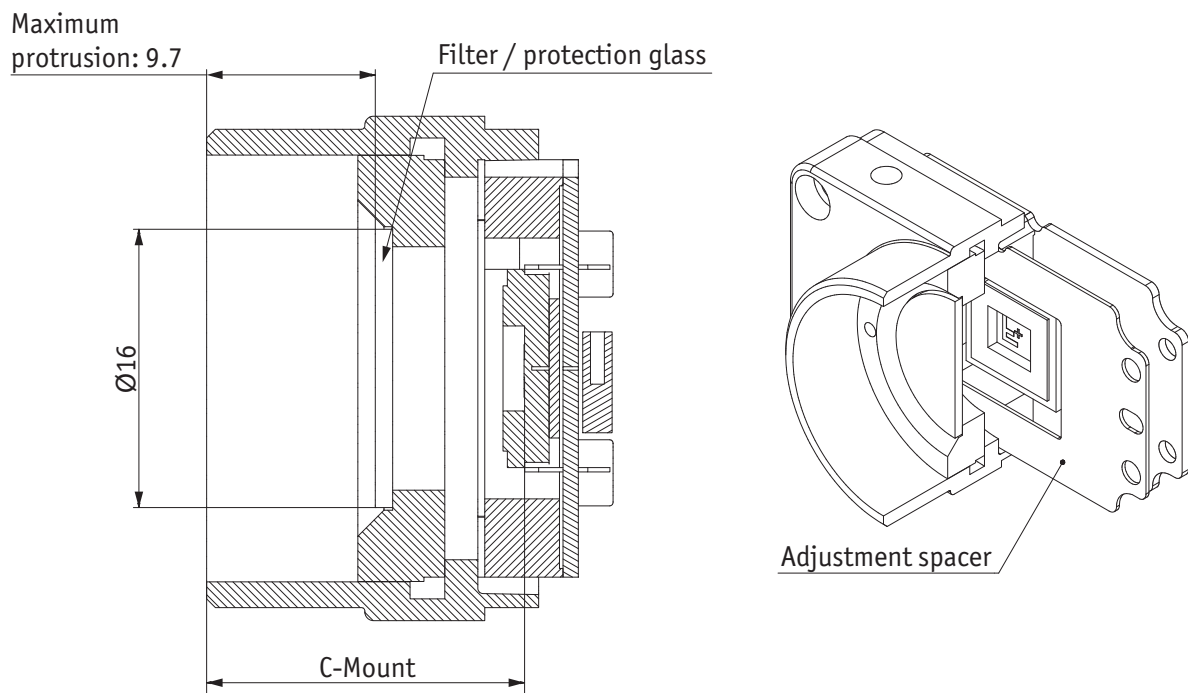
Manta C-Mount dimensions (16 mm filter, type A)
